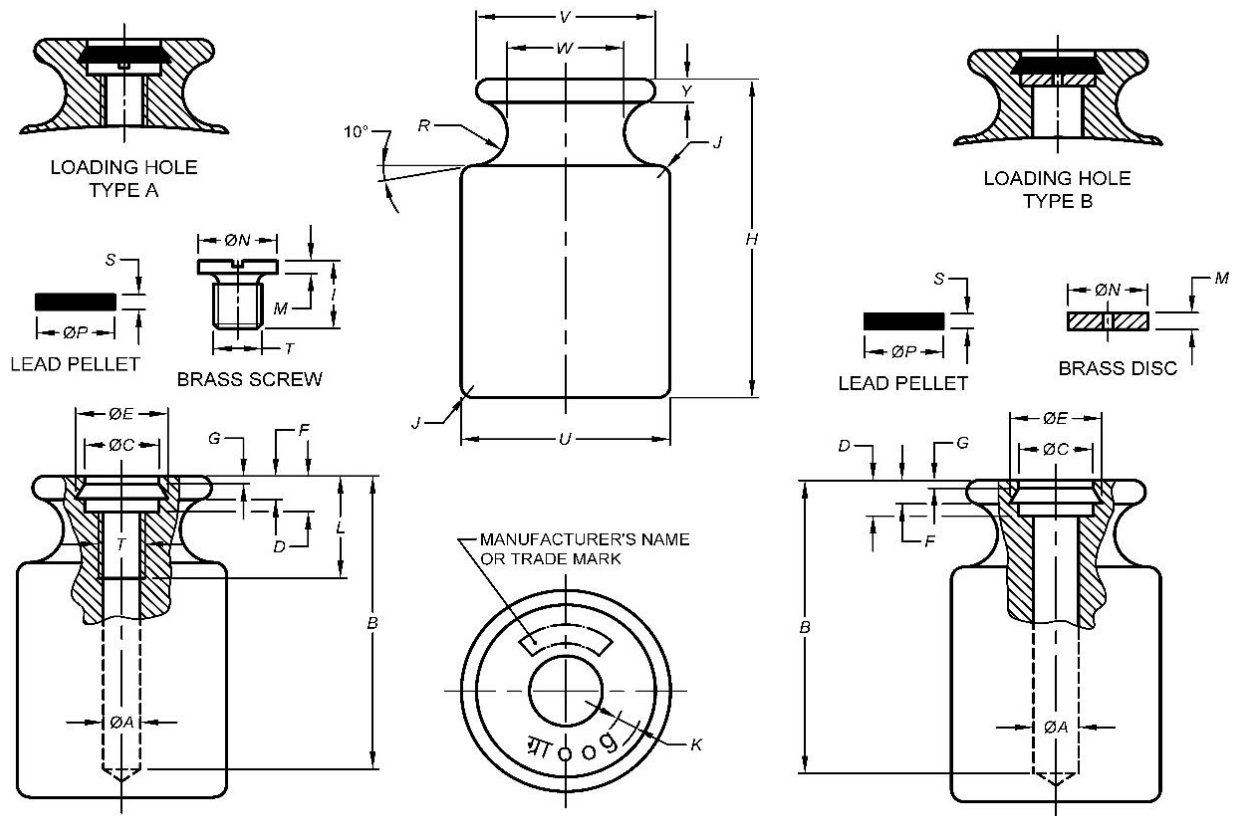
CYLINDRICAL, KNOB TYPE WEIGHTS
